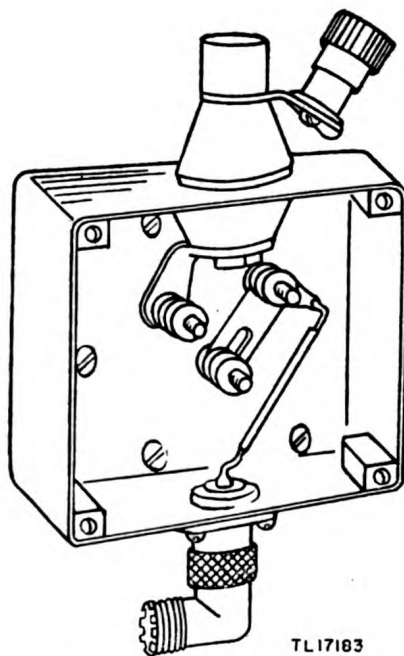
Terminal Box TM-218, line settings for coaxial cable lead-in.
